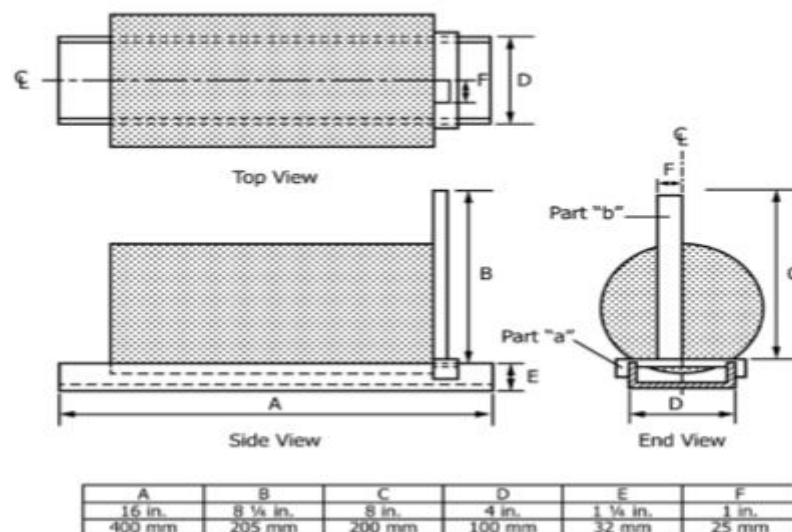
Set up of tensile strength of cylindrical specimens in the testing machine
